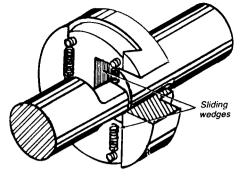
Sliding wedges clamp down on the flattened end of the shaft. They spread apart when torque becomes excessive. The strength of the springs in tension that hold the wedges together sets the torque limit.
